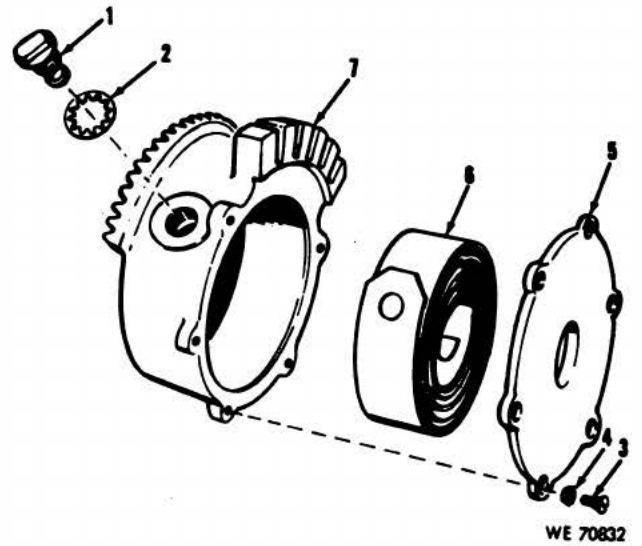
Lower mount machine gun group (for mount machine gun 7364, H75)—exploded view.
